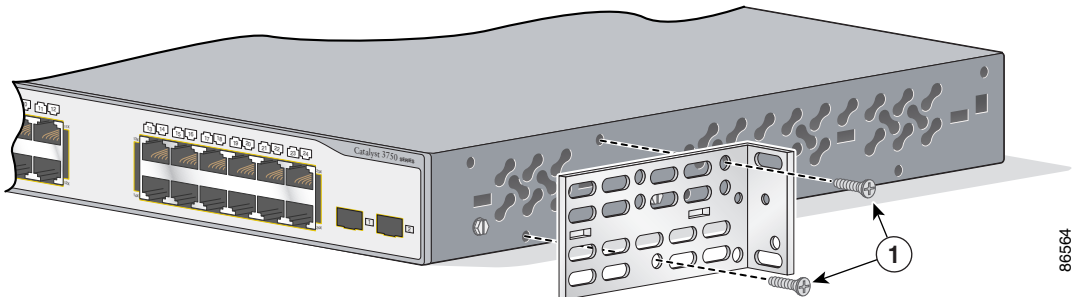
Attaching Brackets for 19-Inch Racks, Rear Panel Forward
